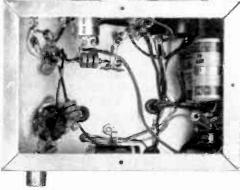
Underside of transmitter. To layout your chassis, take dimensions from pictorial and multiply by about 2. Arrangement of parts in RF section of transmitter is important; therefore, duplicate our layout as closely as possible. The lugs at the left side of switch S2 are S2A.
